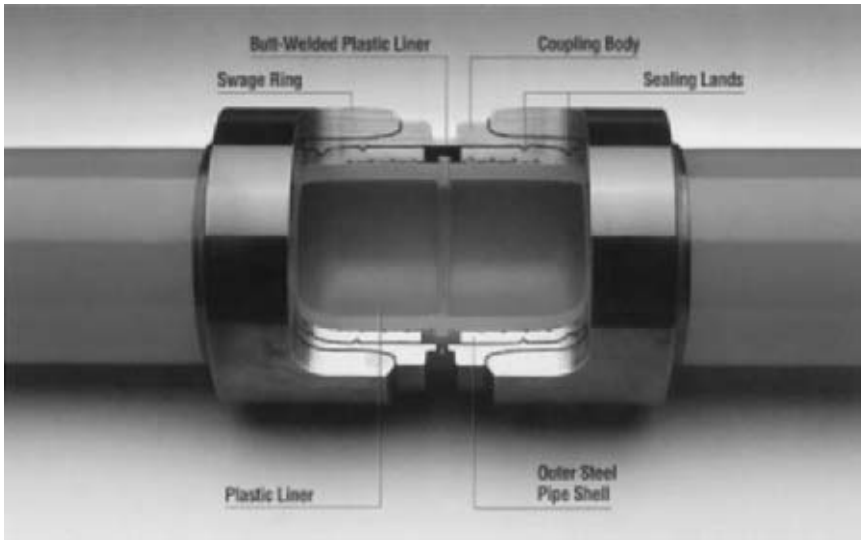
Sectioned view of a butt-fusion-welded polypropylene plastic liner connected with a mechanical coupling. (Courtesy of Crane Resistoflex)
